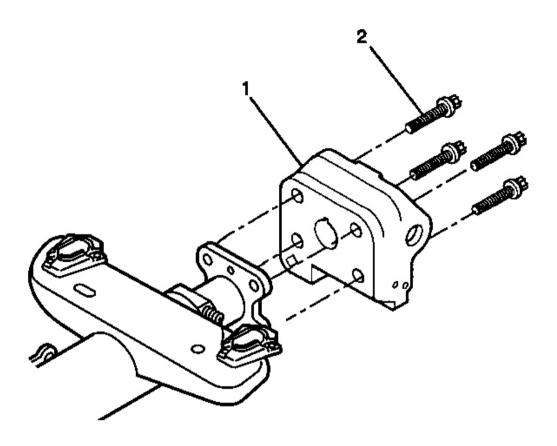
4 TORX(R) Head Screws & Steering Column Support Assembly Courtesy of GENERAL MOTORS CORP.
